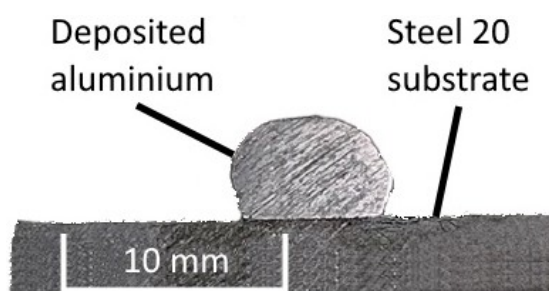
Cross-section of the deposited aluminium bead produced in the following mode:
